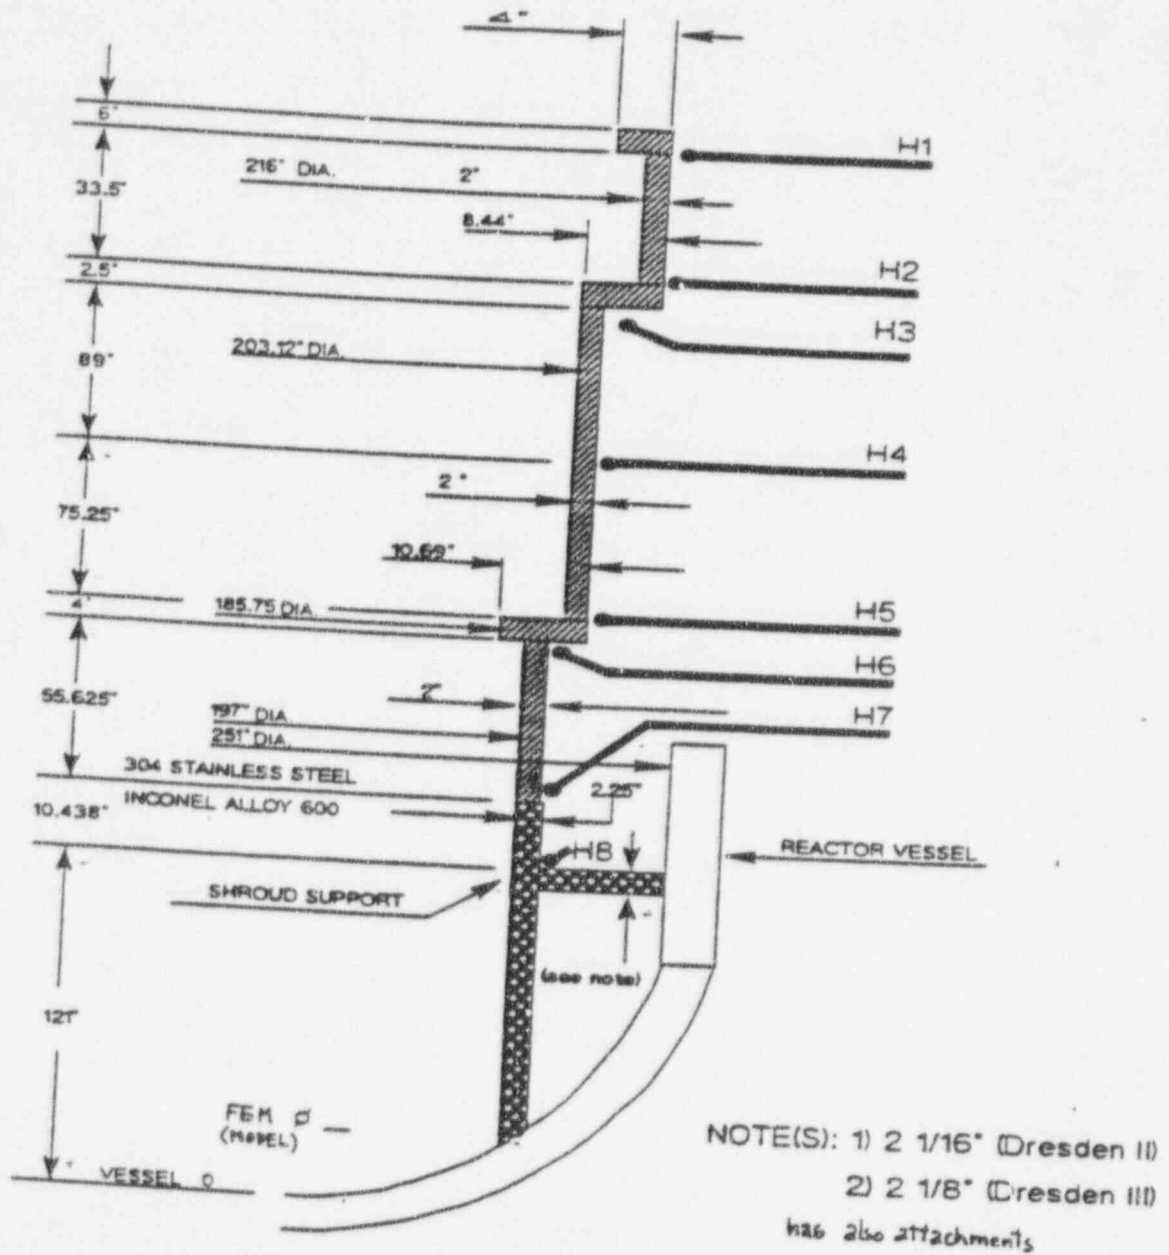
Shroud Horizontal Weld Designations
